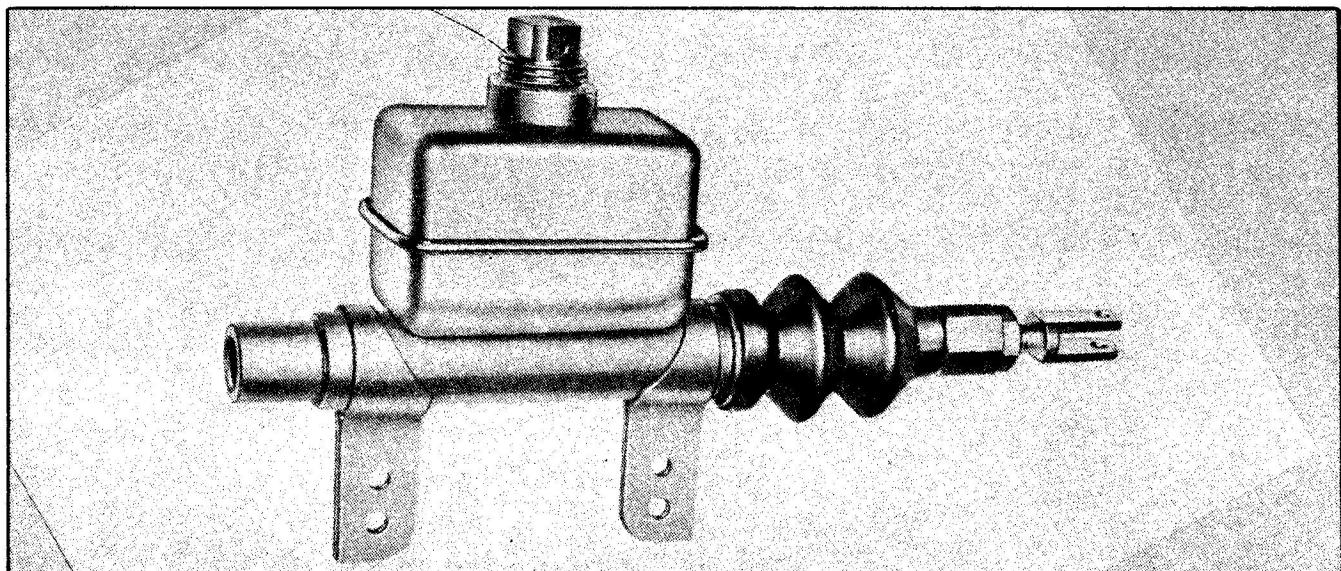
A—Three-quarter Front View—2-inch Master Cylinder
